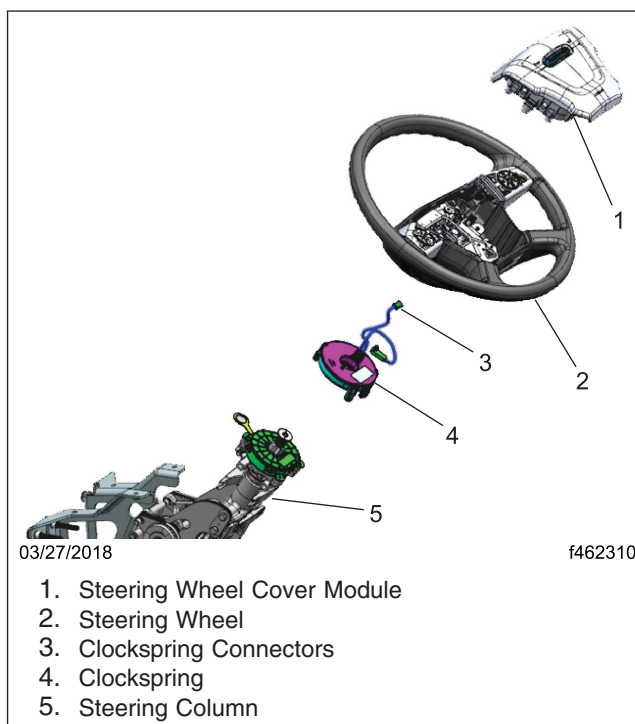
, Steering Wheel Cover Module, Steering column and Clockspring
